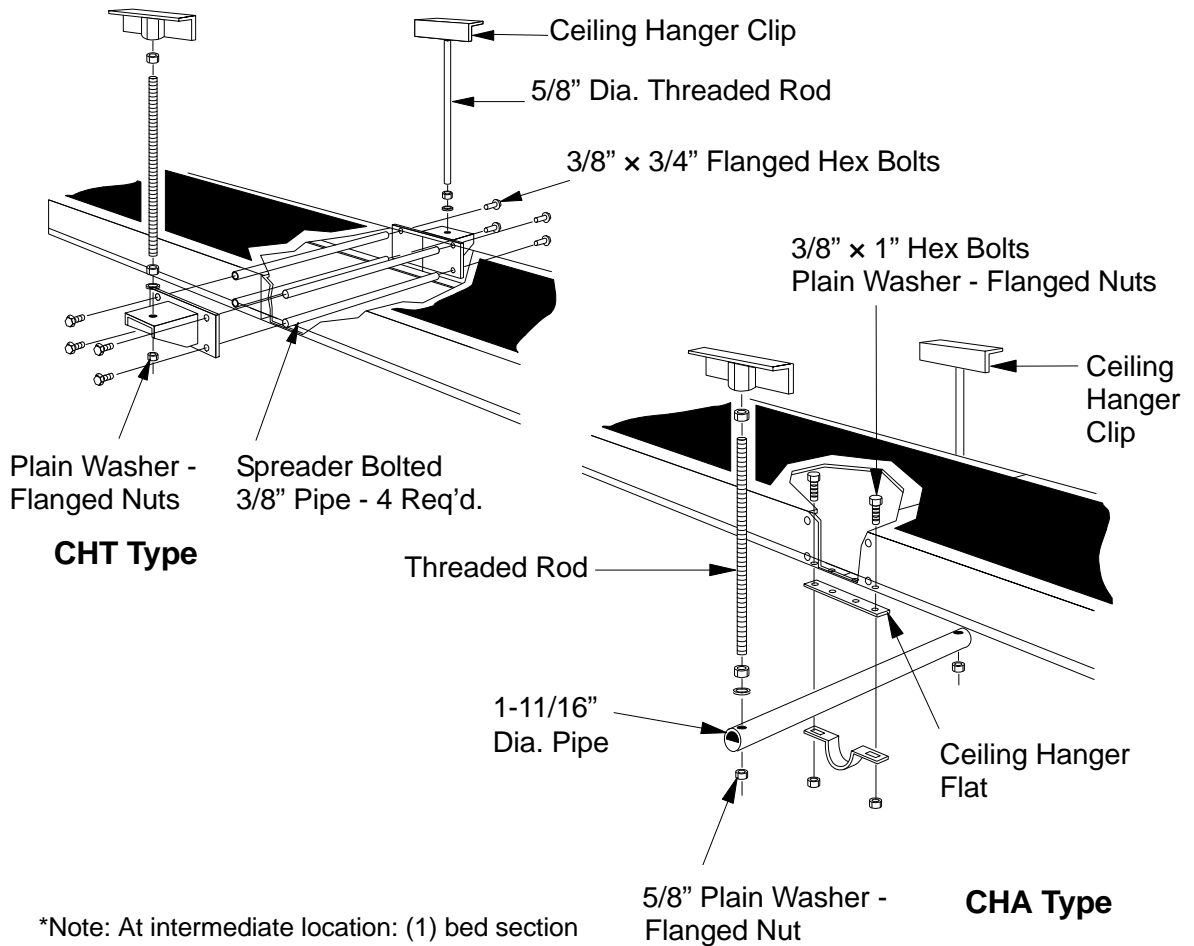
Ceiling Hangers - Types CHT and CHA
